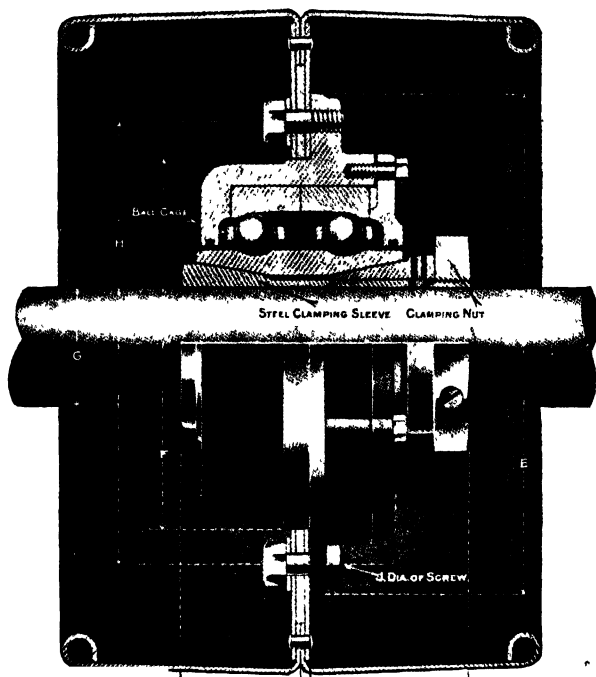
A.—Loose pulley fitted with Hoffmann's ball-bearing.
